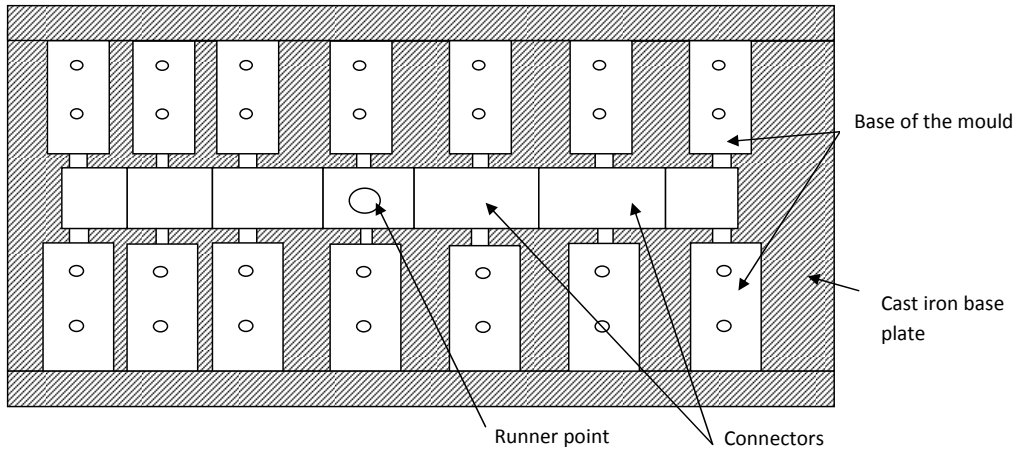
Top view of ingot moulds set on top of a cast- iron base plate
